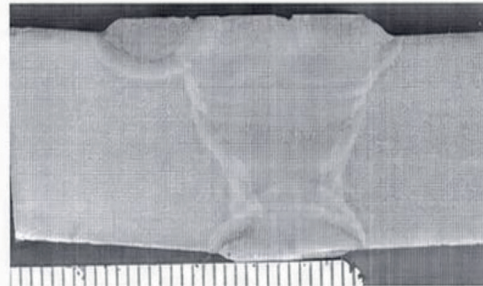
The macro-etched cross-section of the weld joint reveals no visible cracks, porosity or slag inclusions which confirm sound quality of the weld joint
